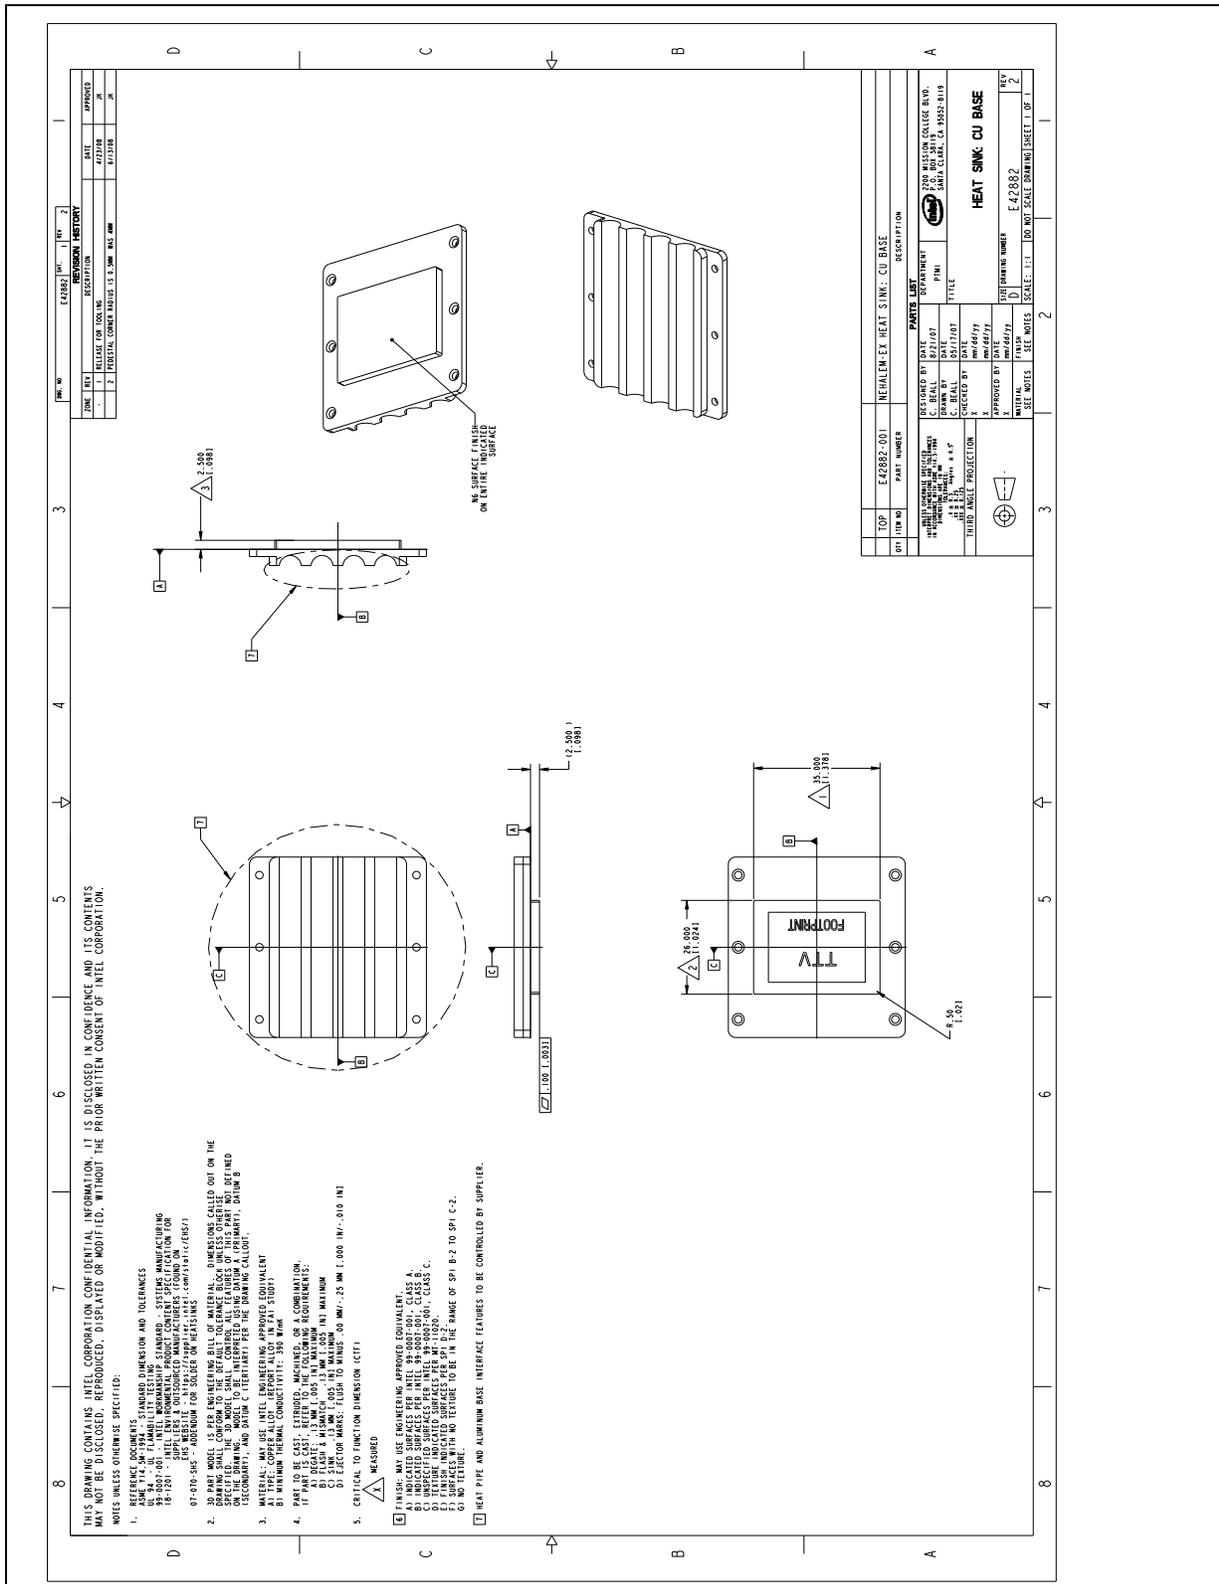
Tower Heatsink Drawing – Sheet 8 of 14
